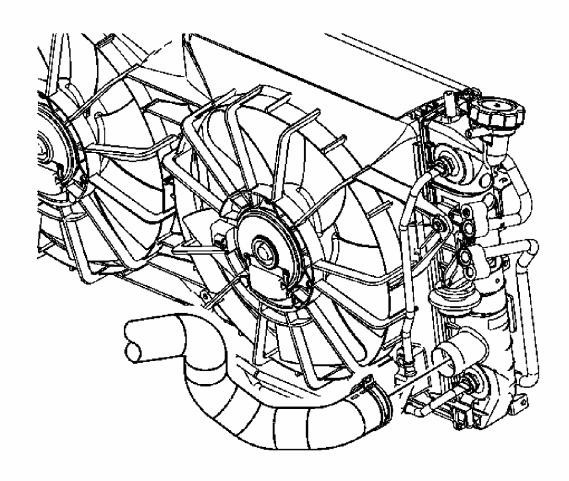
Removing/Installing Radiator Outlet Hose Courtesy of GENERAL MOTORS CORP.
